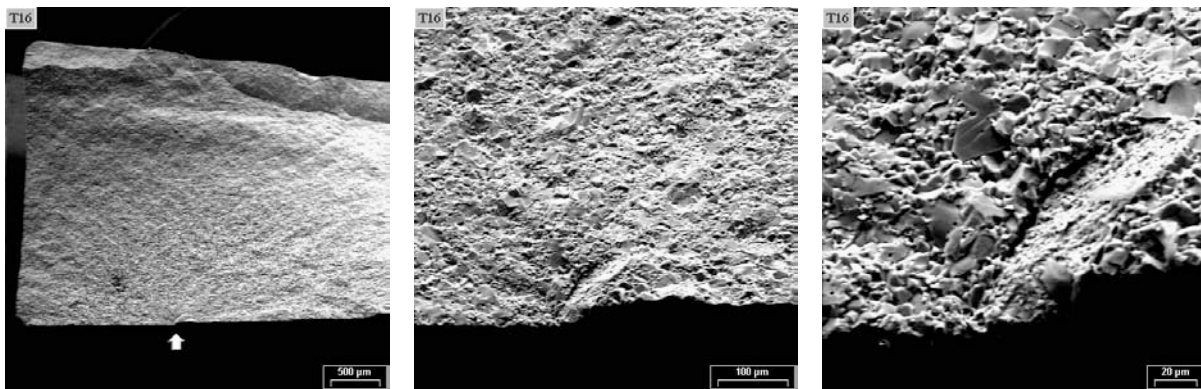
Fracture surface of a transversely-ground, chamfered, ASTM C1161B bend showing (left to right) progressively higher magnification images of the location containing the strength-limiting flaw.
